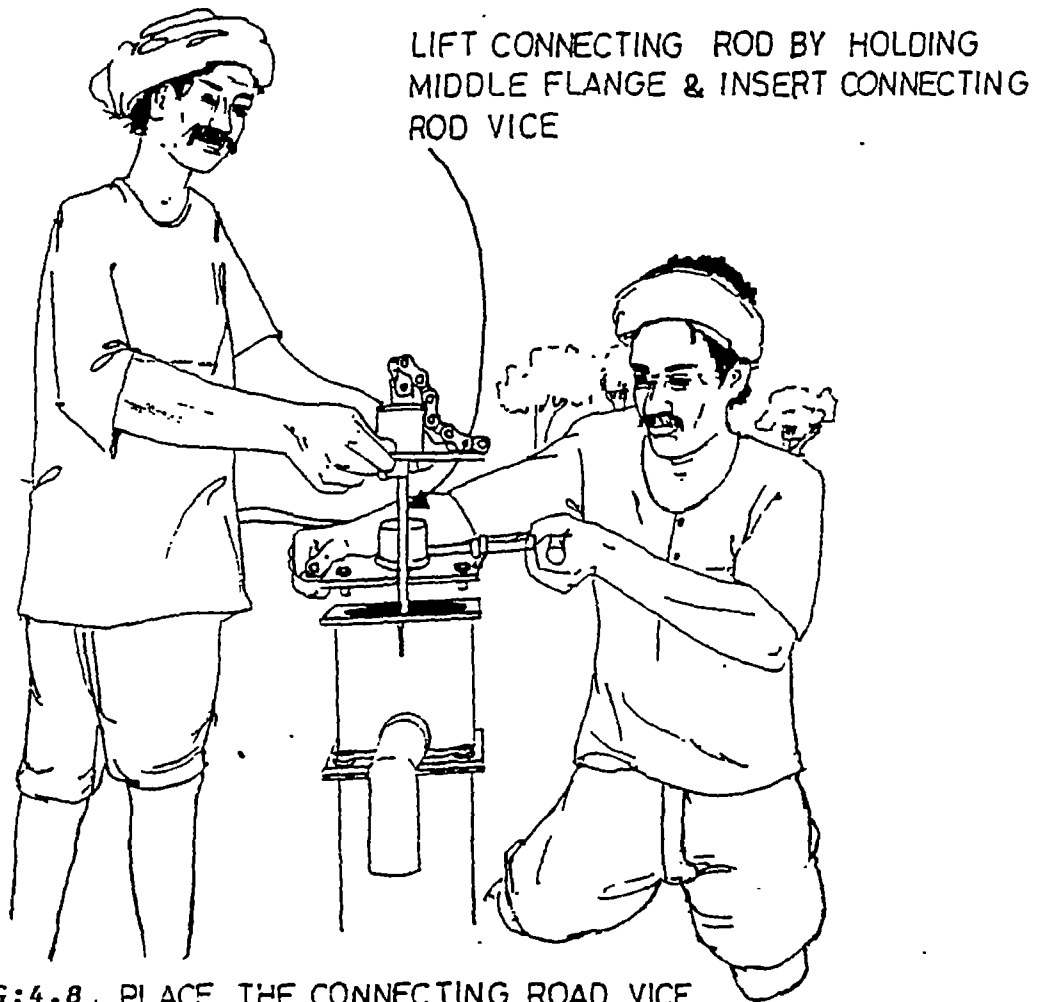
PLACE THE CONNECTING ROAD VICE
